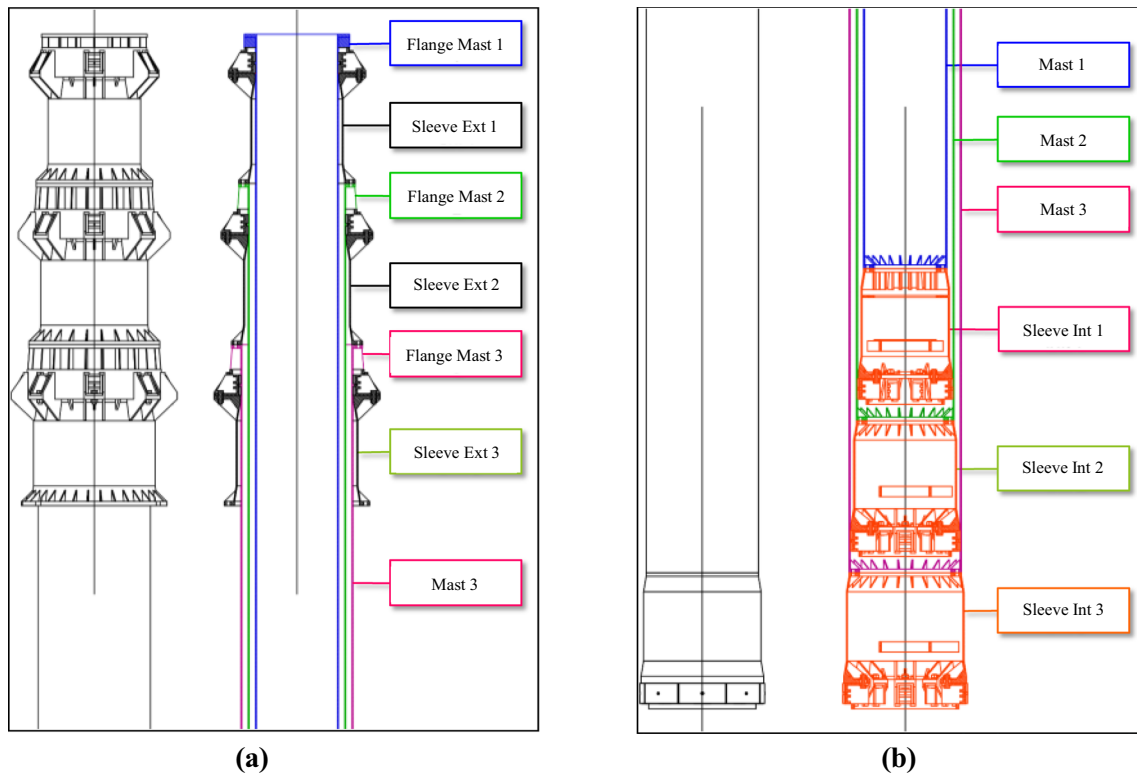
Schematic draft of the coupling between masts and sleeves: a upper part of the masts, b lower part of the masts
